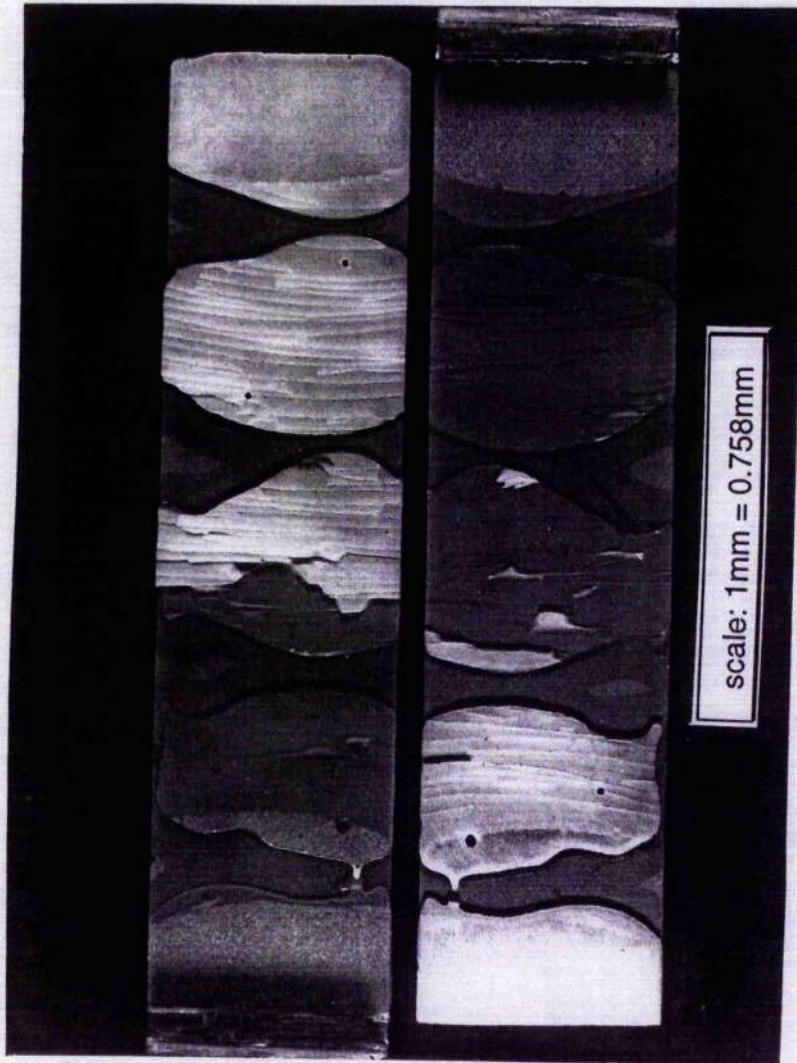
Typical failure surface of a 100mm overlap Araldite 2007 bonded steel lap shear joint when the adhesive is applied in discrete strips
